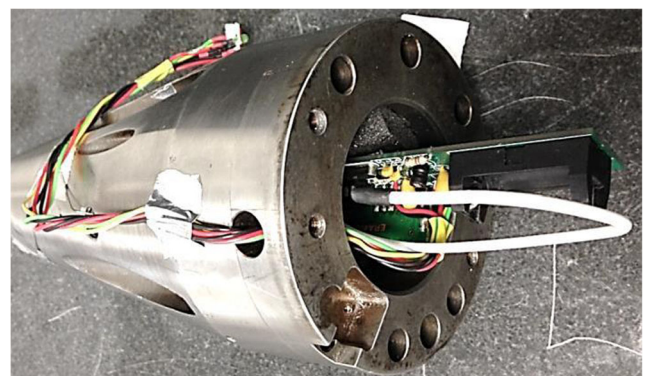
Wifi temperature measuring device set on the welding head [36]
